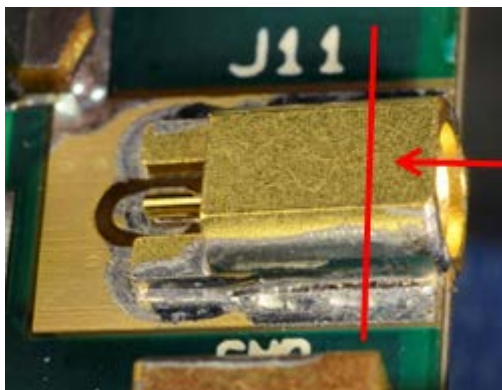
Soldered Surface Mount Connector with Joint Crack. Arrow Points to the Sectioning Plane.
